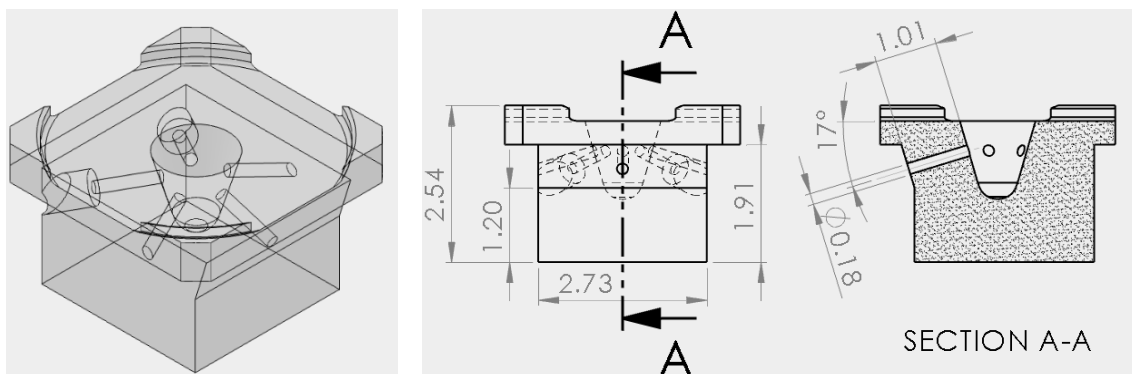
Isometric and sectional views of Spray M, showing key geometric features and dimensions in millimetres.
